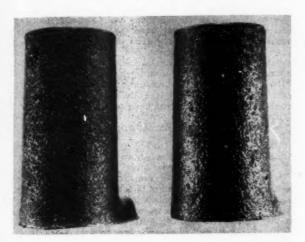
Pinhole defects in the well of the fluidity casting typical of all heats made under hydrogen and water vapor. These defects were absent when melted under other gases, CO for example, as shown in the sample on the right.
